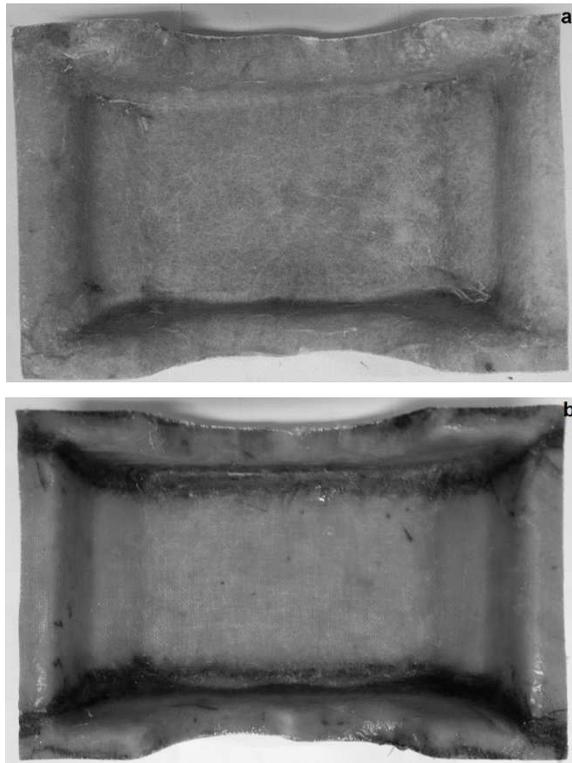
Final product (gear housing) made of: a) glass chopped-strand mat, b) glass plain-woven fabric
